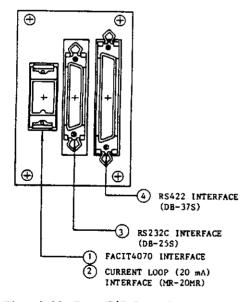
Data I/O Interface Receptacles in Control Cabinet
